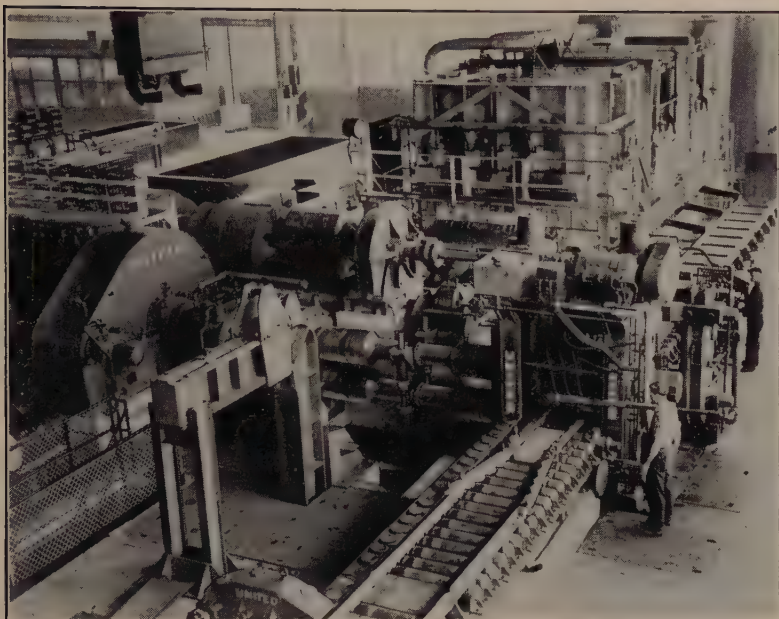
MODERN HOT BREAKING-DOWN MILL.
